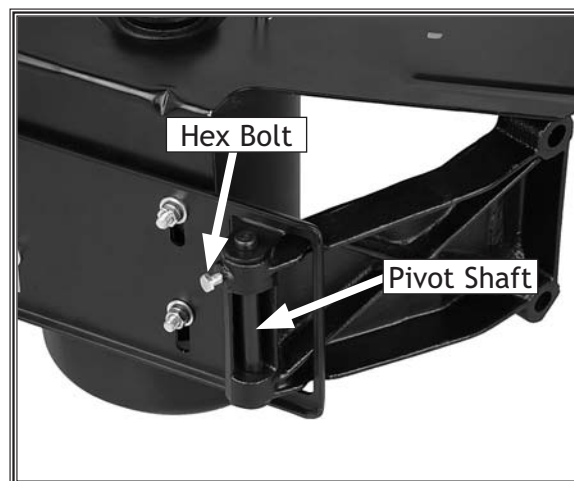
Pivot shaft and hex bolt in mounting bracket.
